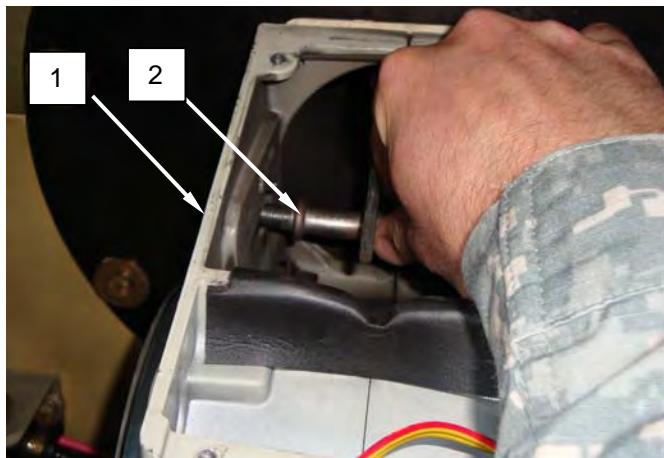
Removing Fuel Line Tube from Housing Assembly.
